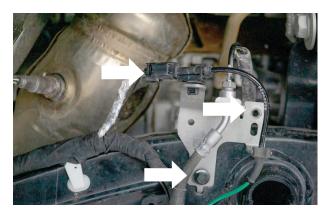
Disconnect the ABS wire and remove the brake line bracket bolts.
